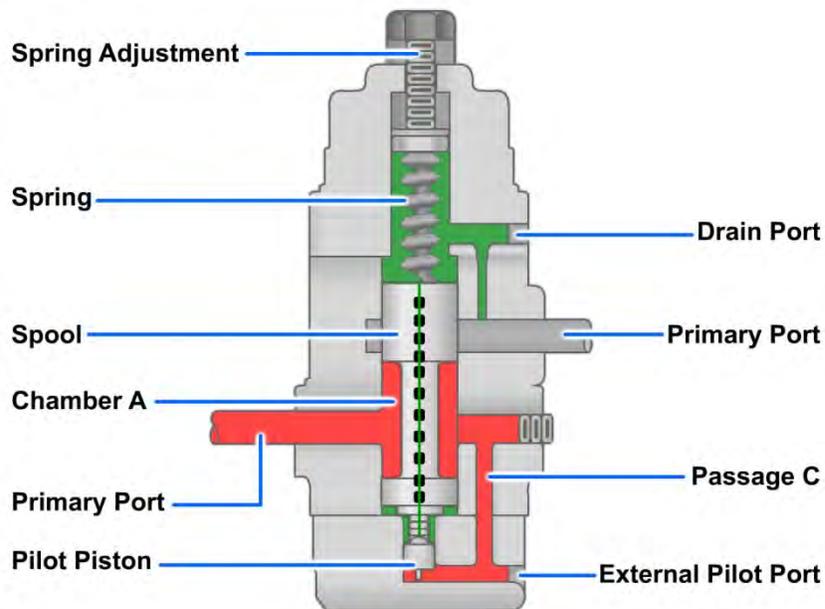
Internal pilot-actuated pressure-reducing valve.
